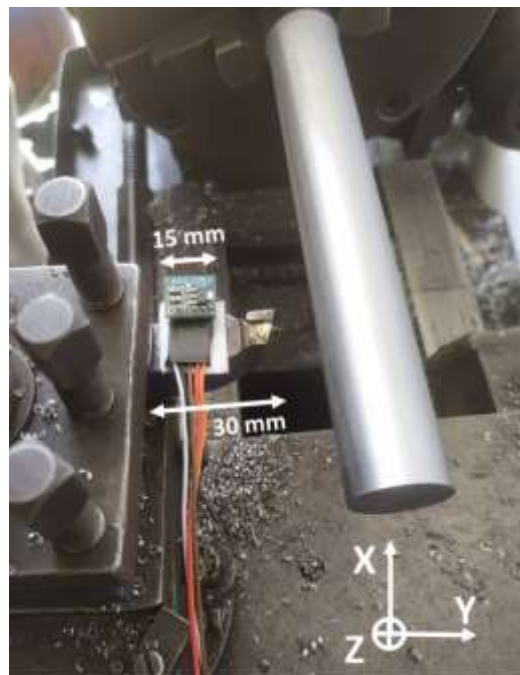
Cutting tool and the work-piece mounted on the lathe machine used for the experimental study
